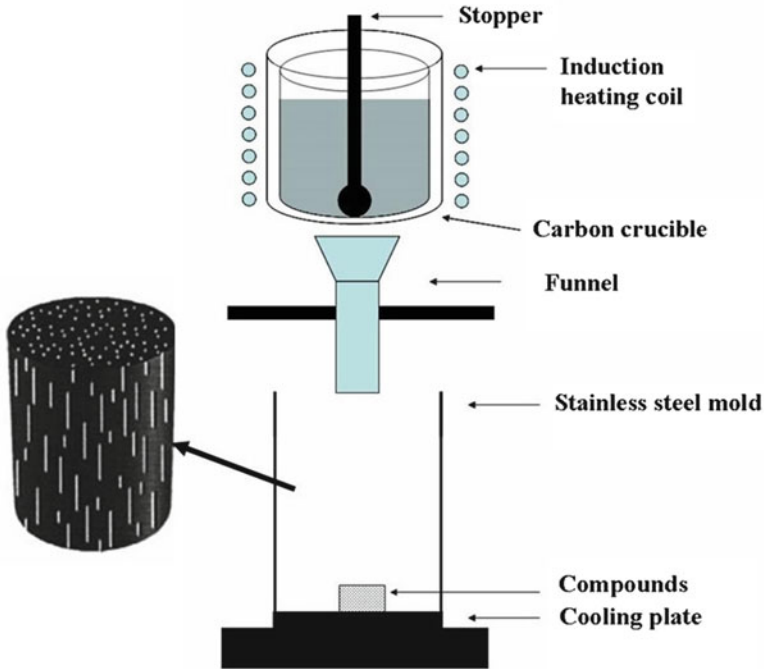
Mold casting technique for fabrication of lotus aluminum by thermal decomposition technique
